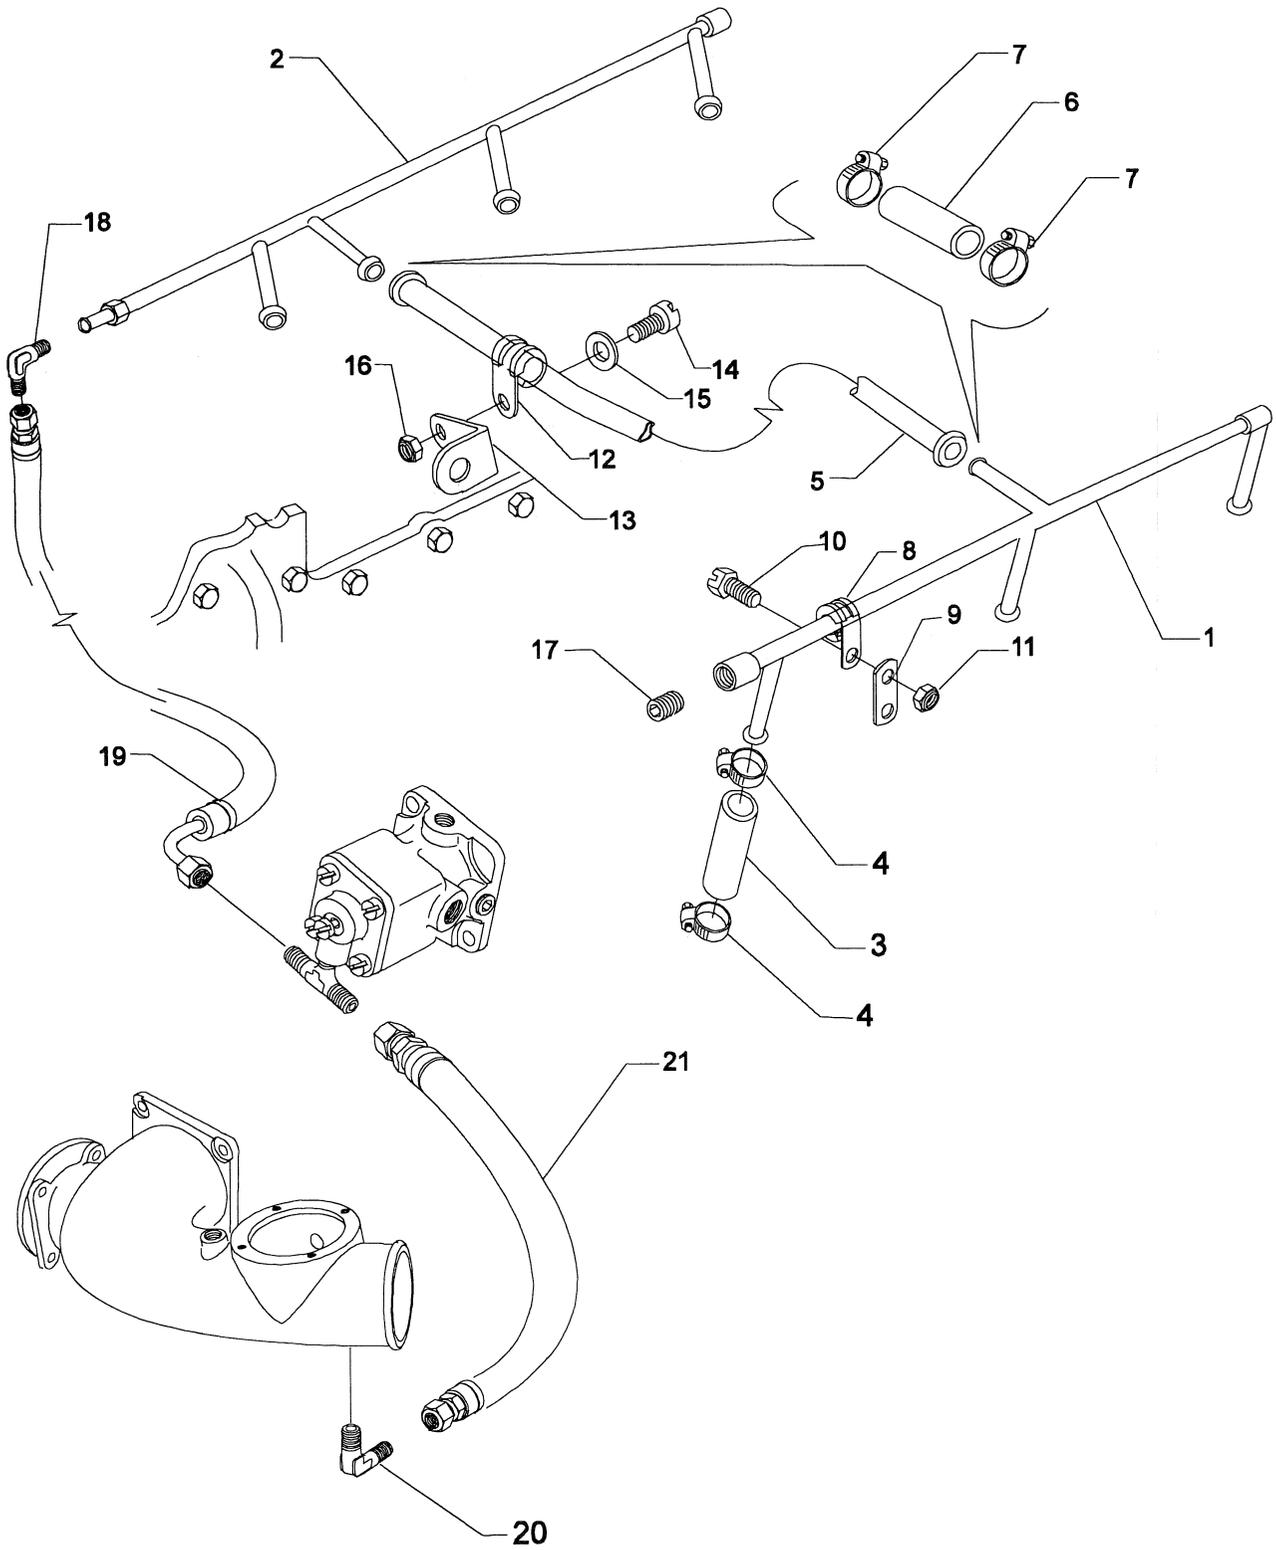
INJECTOR NOZZLE VENT MANIFOLDS, HOSES AND ATTACHMENTS
